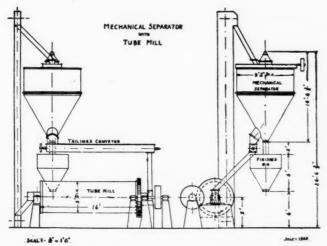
Front and end view of mechanical separator connected to a tube or ball mill
